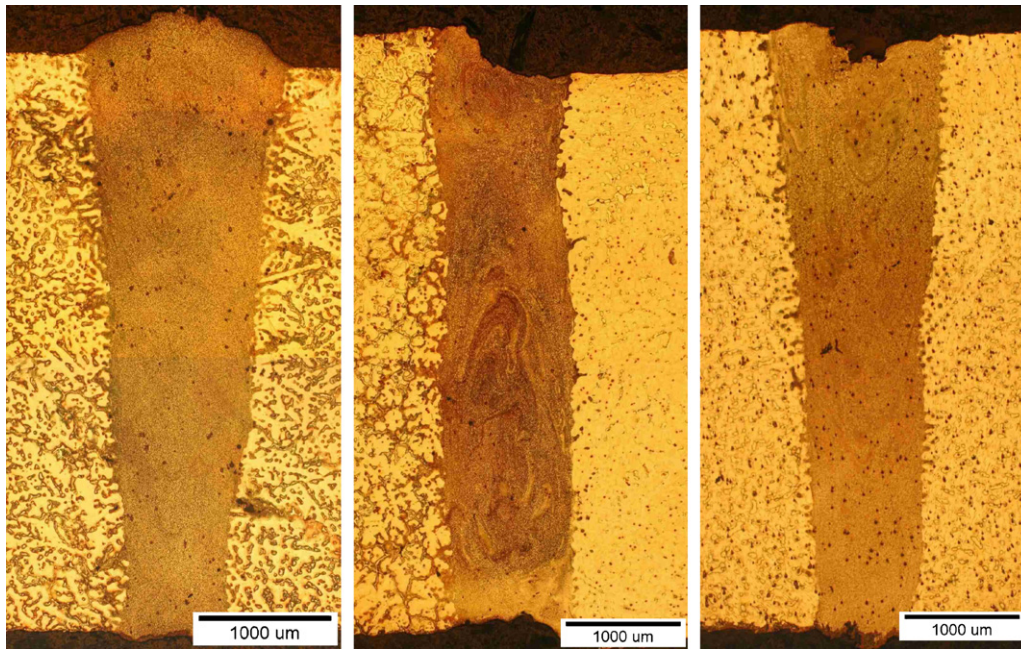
Macrosections of butt-welded joints: AZ91 + AZ91, AZ91 + AM50, AM50 + AM50.
